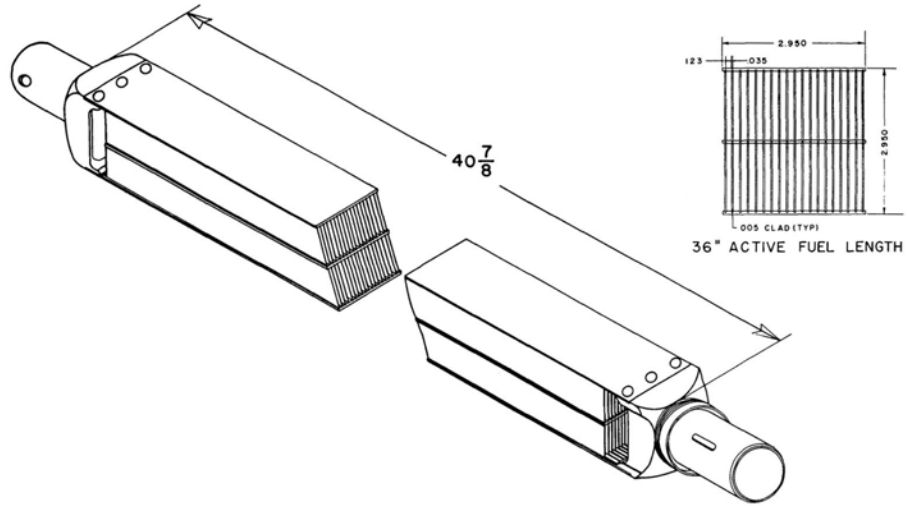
Spert Type-C Fuel Assembly (Ref. A-26)
